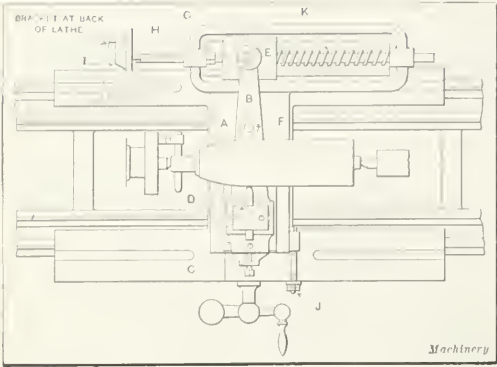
Shell Turning Attachment with Tool working on Wall of Shell
